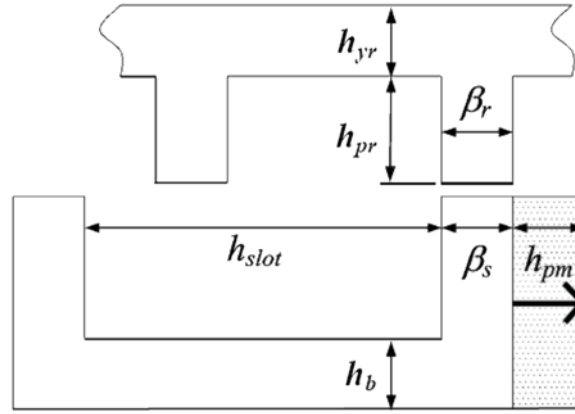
Main dimension configuration of the outer rotor PMFS machine.
